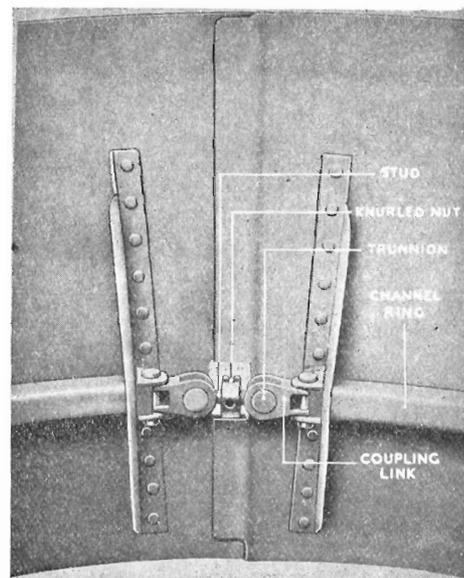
Scrap view of inside of fairing showing turnbuckle
